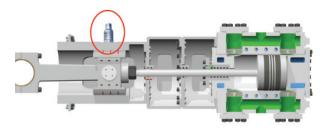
Recommended location of accelerometer measurement on crosshead guide
